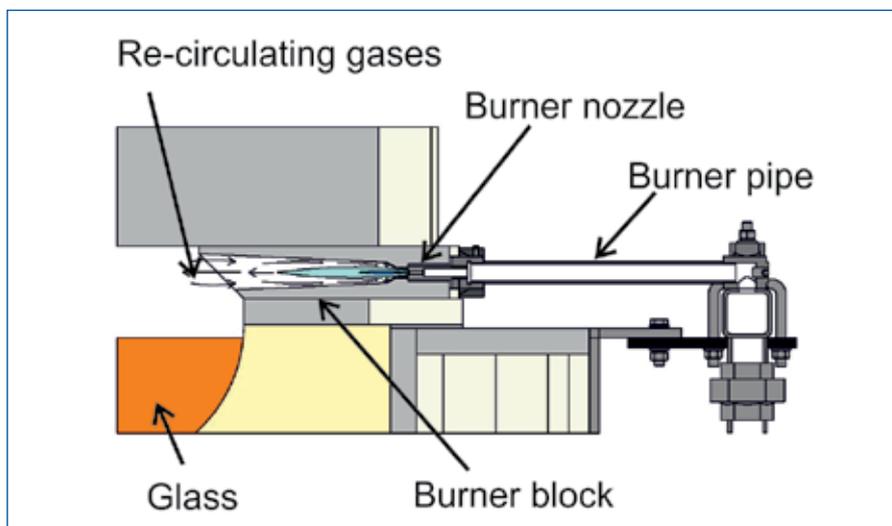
Forehearth Burner And Refractory Burner Block Assembly.
